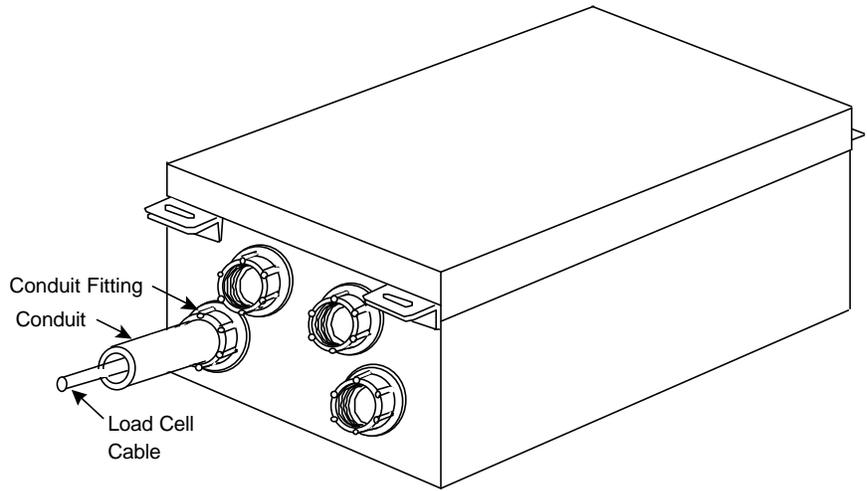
Large Analog Junction Box with Conduit Fittings
